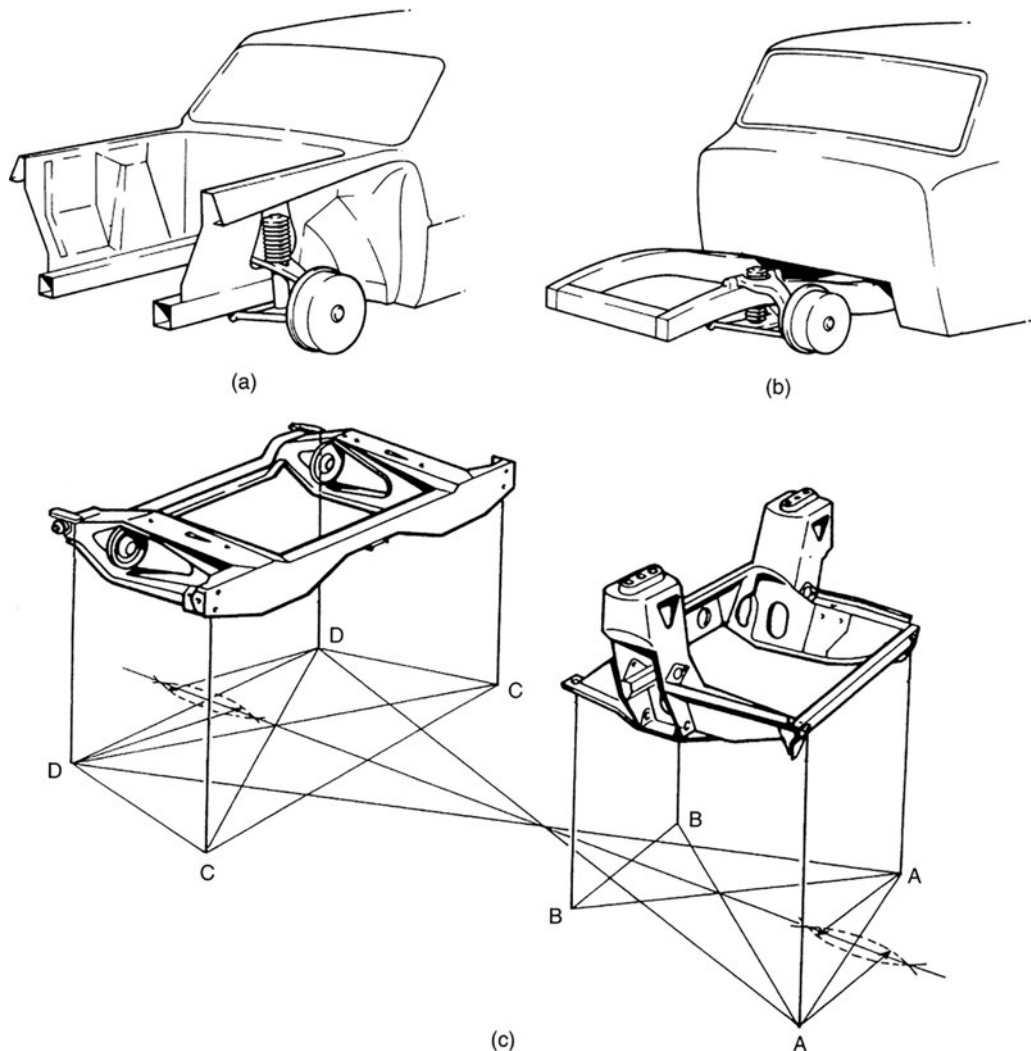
Front end construction (a) integral or mono (b) composite and (c) front and rear sub-frames, these are bolted separately to the body assembly
